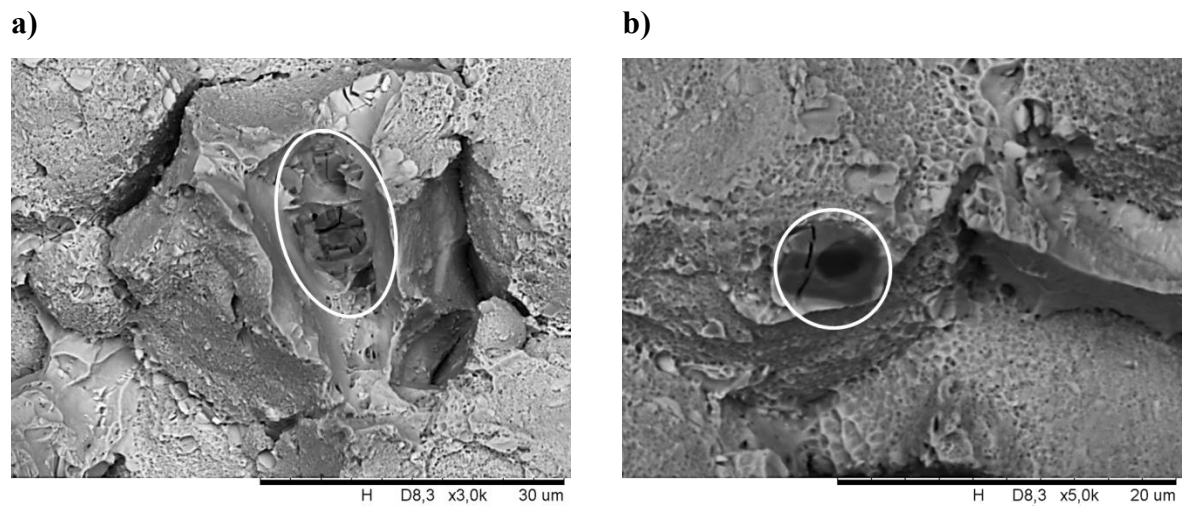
BSE SEM micrographs highlighting broken precipitates embedded in the fracture surface of HIPped specimens after tensile testing: a) fractured TiC carbides; b) fractured oxy-carbide embedded in fracture surface. Fractured precipitates are circled.
